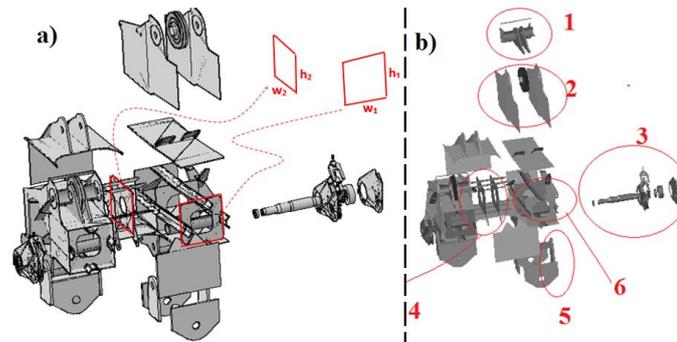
Explosive drawing for the head part of the crane structure, a) Indication of the dimensions presented in Table. 1 b) Numbered details, presented in the Fig. 10, one by one
